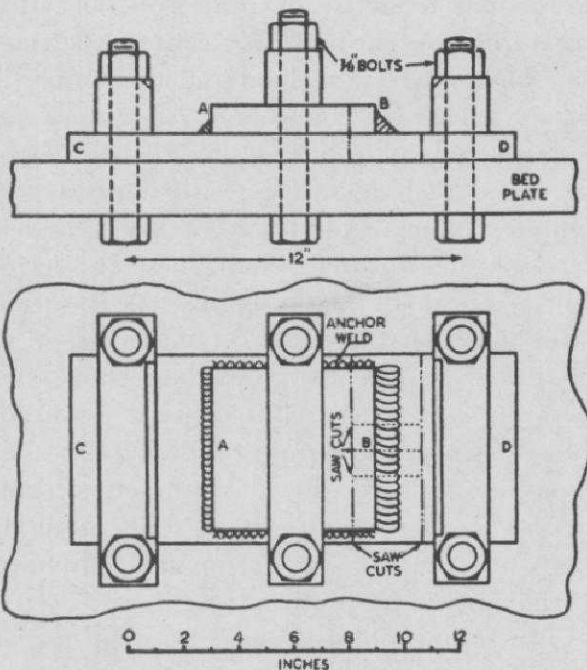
THE REEVE WELD-CRACKING TEST
